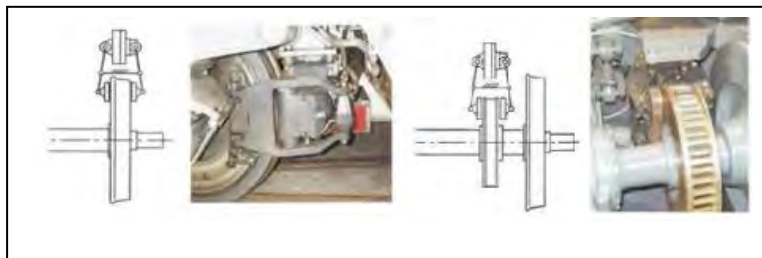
This figure shows a typical wheel mounted disc brake (left) and a typical axle mounted disc brake (right). (Inspired by Gfatter et al., 2007.)
